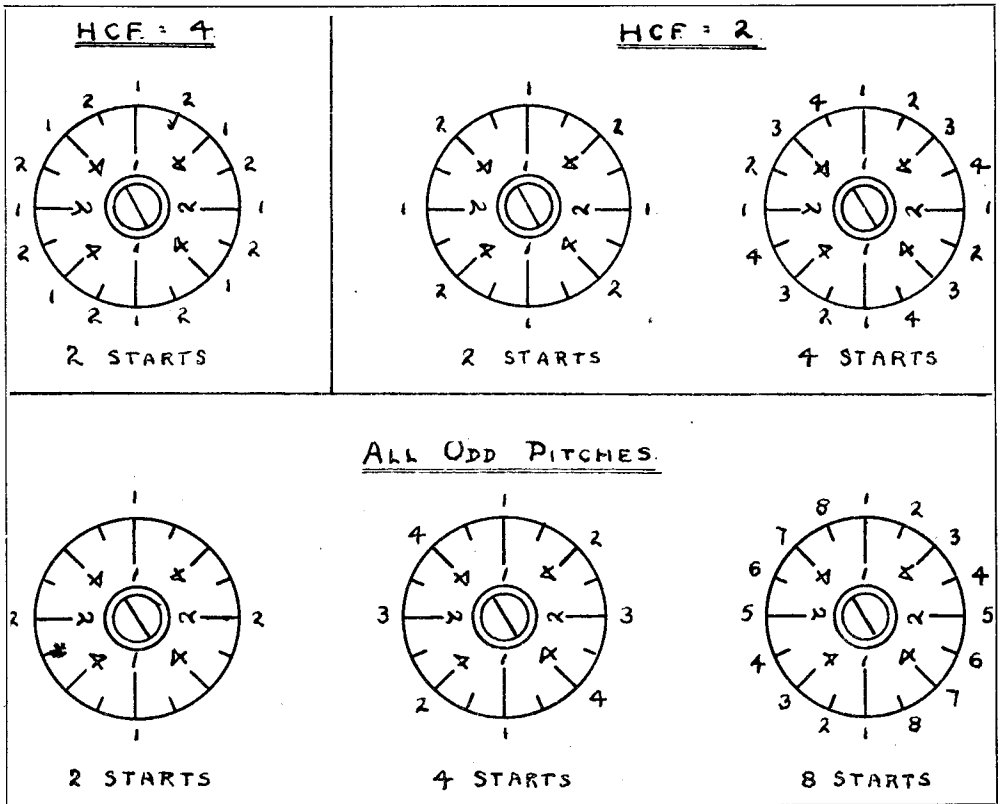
Positions for engaging leadscrew for multiple threads. Sequences will reverse when cutting left-hand threads
